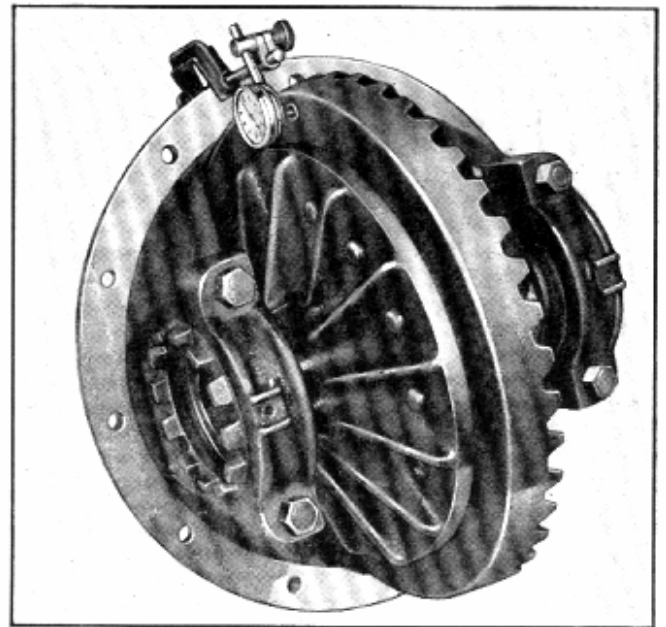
Checking Run-Out of the Back Surface of the Ring Gear
